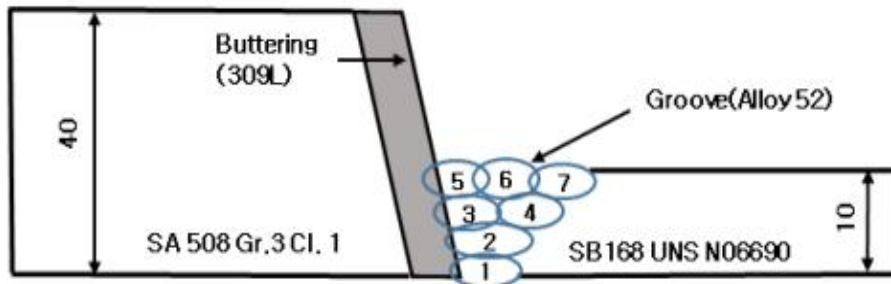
309L buttering and Alloy 52 groove welding schematic diagram.
